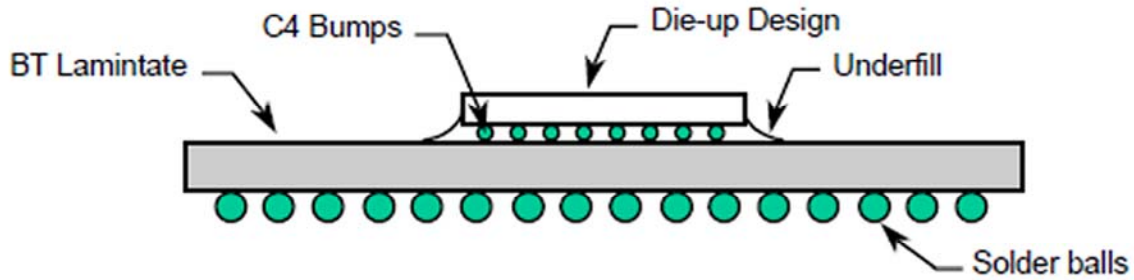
A BGA packaging involving high-lead alloys [13].
